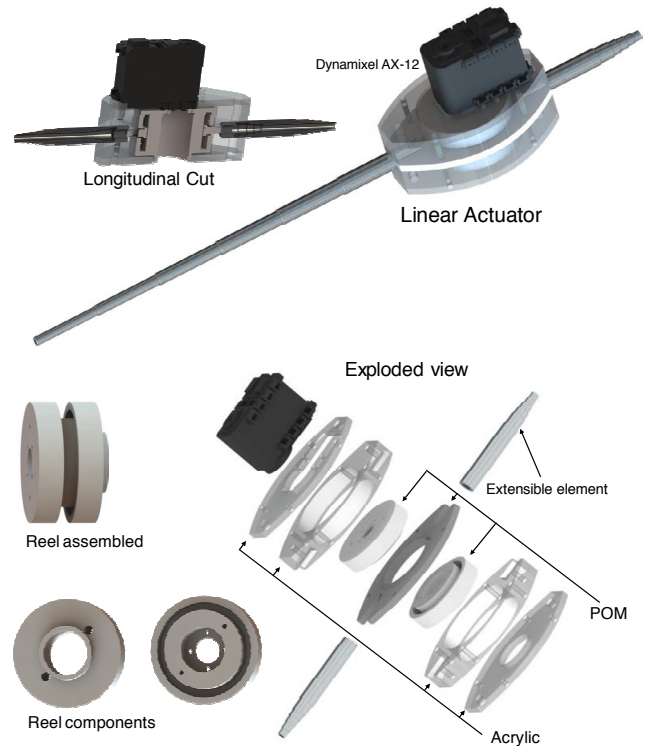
Different views of the design and components used for the construction of the electric linear actuators. The robot can be easily reproduced using digital fabrication techniques, such as laser cutting and 3D printing.
